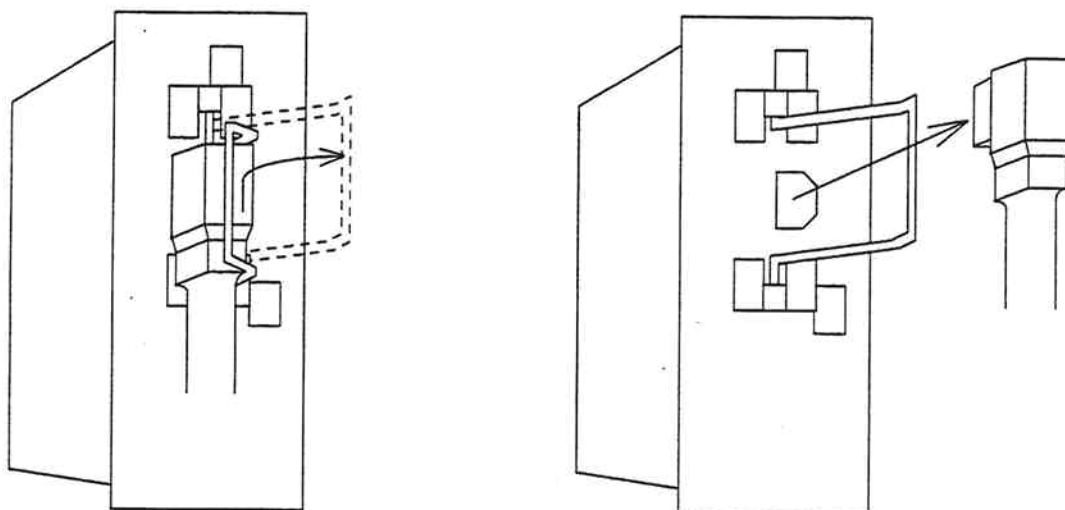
Disconnection of Inlet Cable
